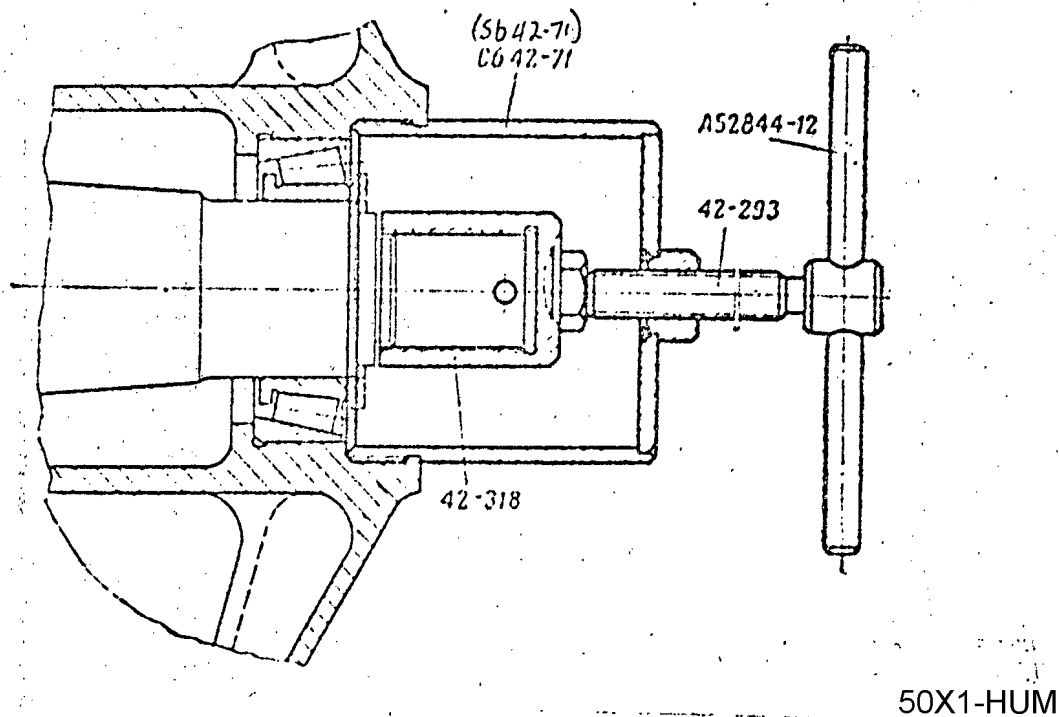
Device for Removal of the Carriage Wheels (Sb42-70):
